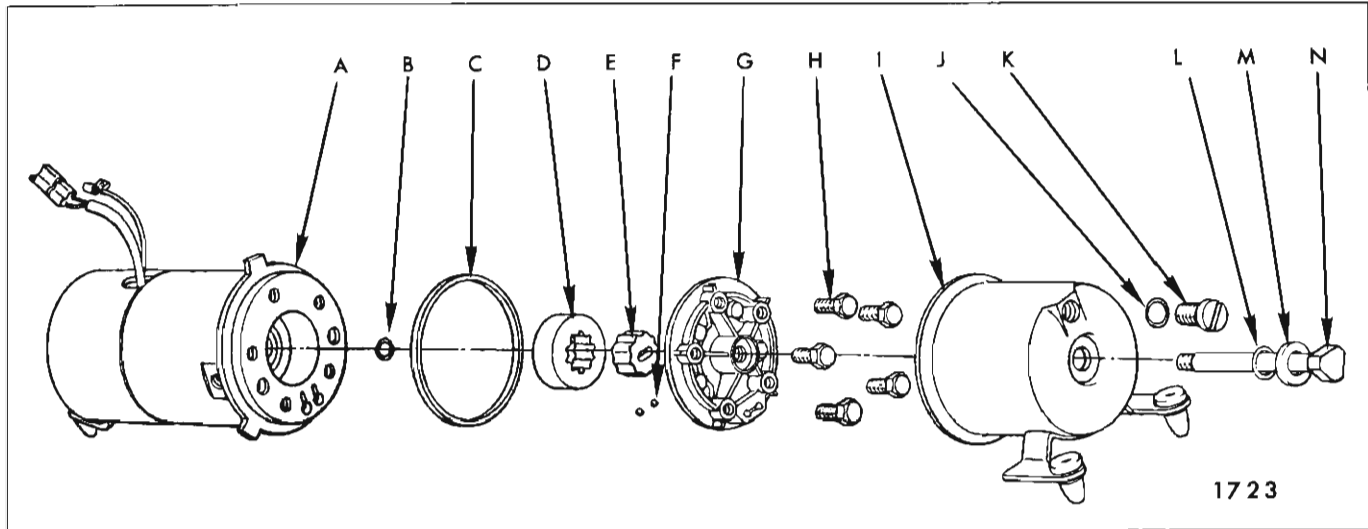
I-59—Hydro-Lectric Motor and Pump Disassembled
